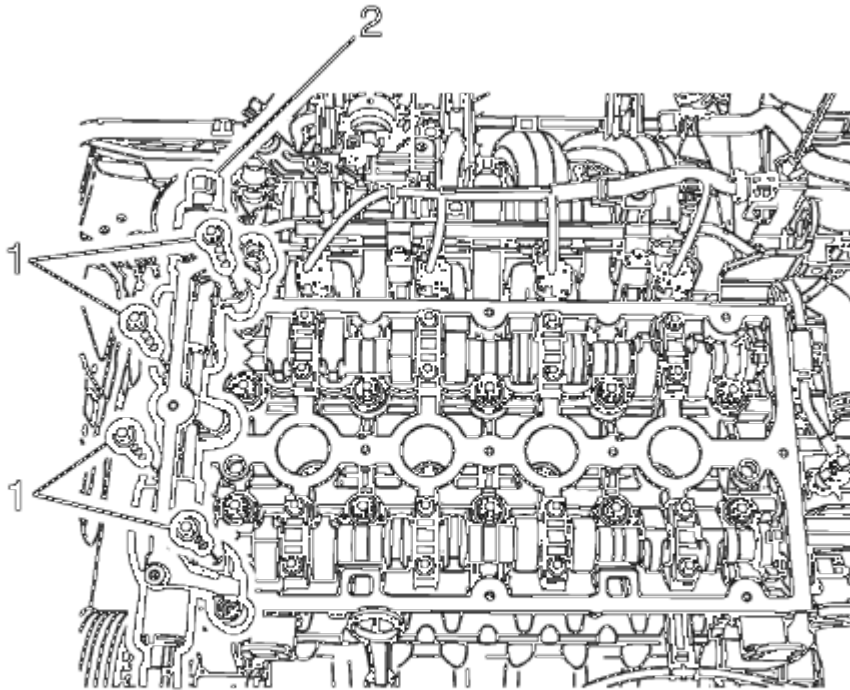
Camshaft Position Solenoid Valve Housing & Bolts
